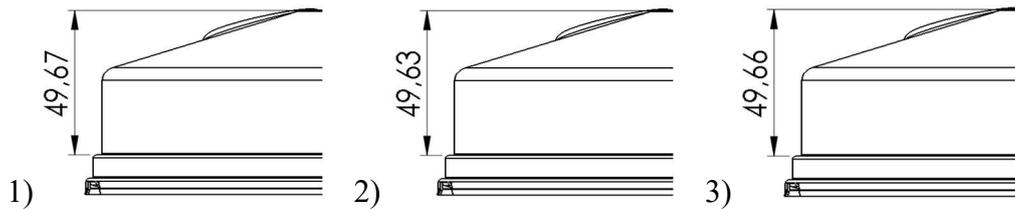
1) First step; 2) Fourth step; 3) Fifth step.
